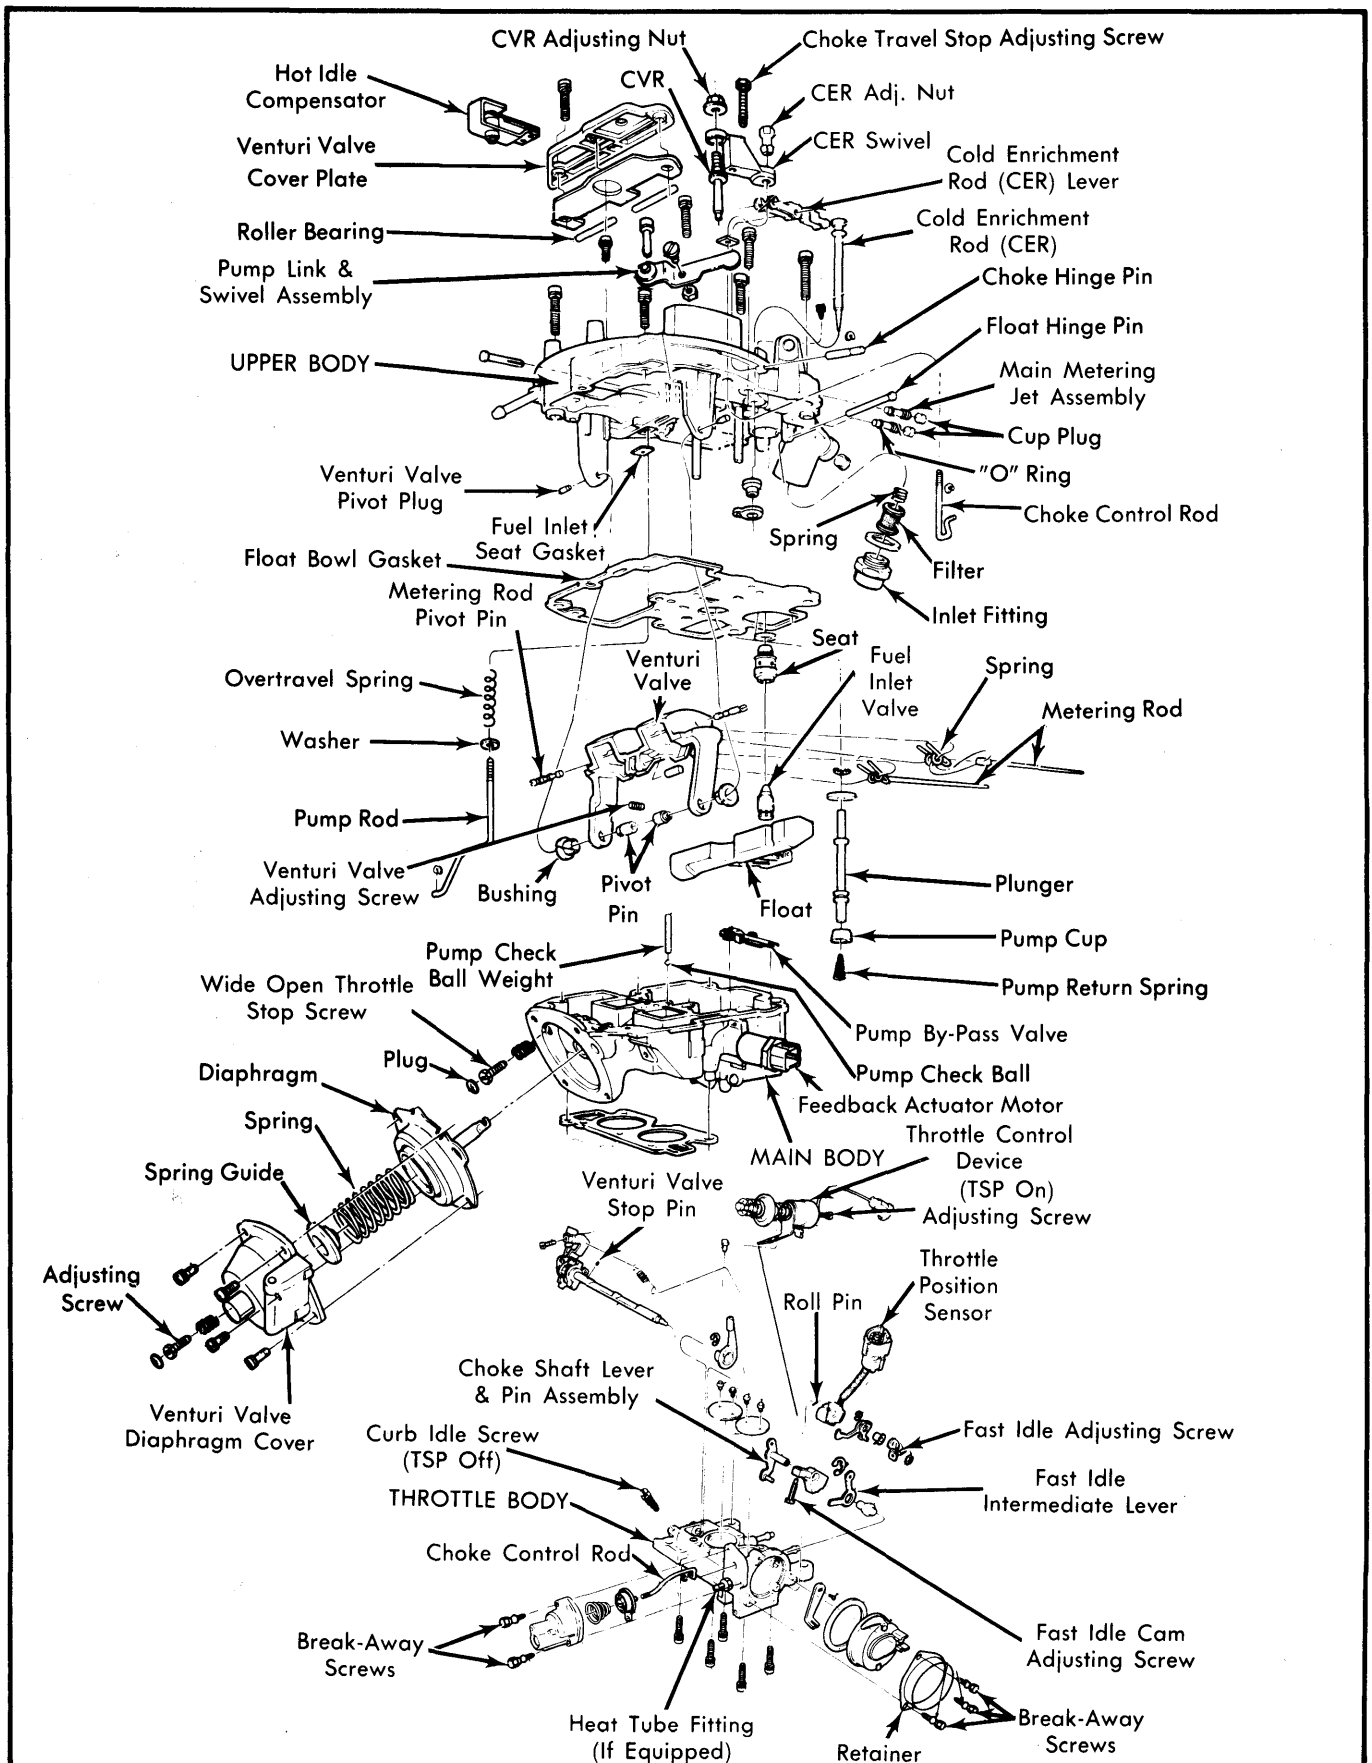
Exploded View of Motorcraft Model 7200 VV Carburetor
